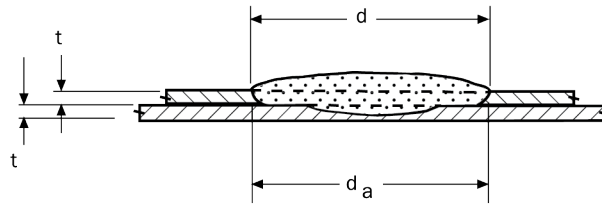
Arc Seam Weld – Sheet to Sheet
